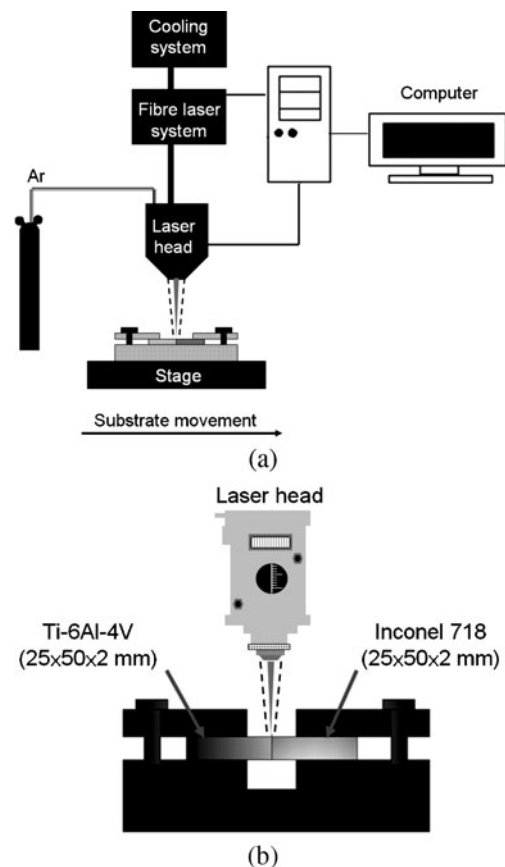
Setup for the fibre laser welding of dissimilar materials process: (a) diagram of the full setup, (b) illustration of the clamped system
